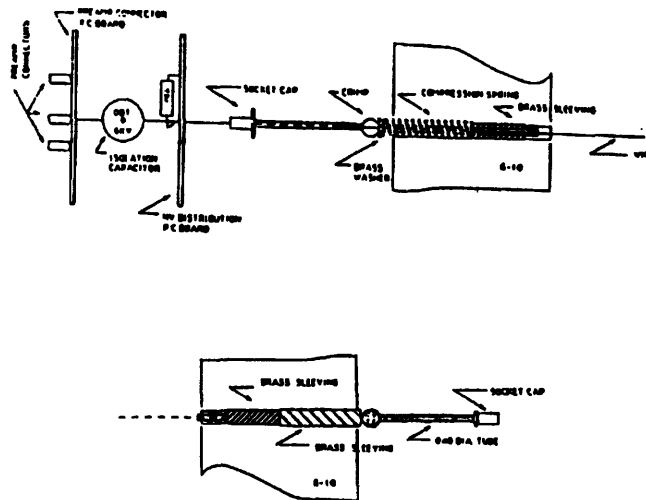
Illustration of the crimping technique used to construct the MIT drift chambers.
